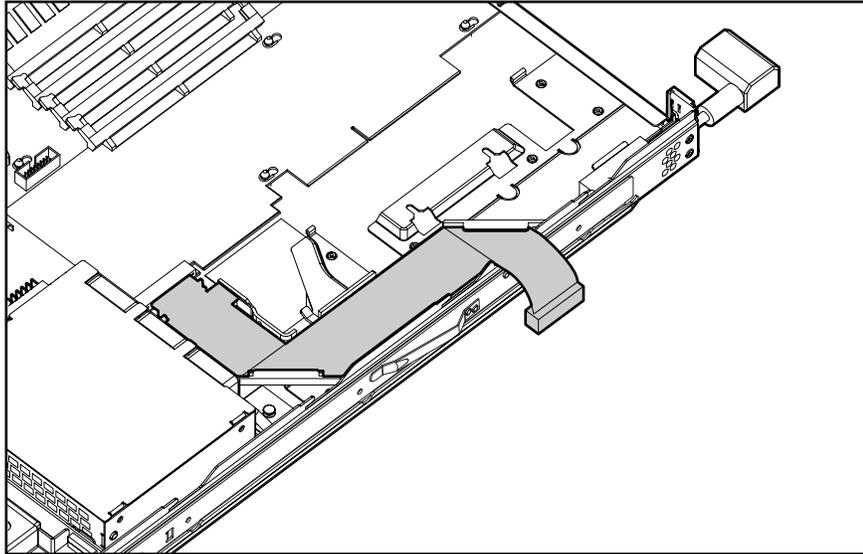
Smart Array/SCSI controller interface assembly installed (PCI riser board assembly removed for clarity)
